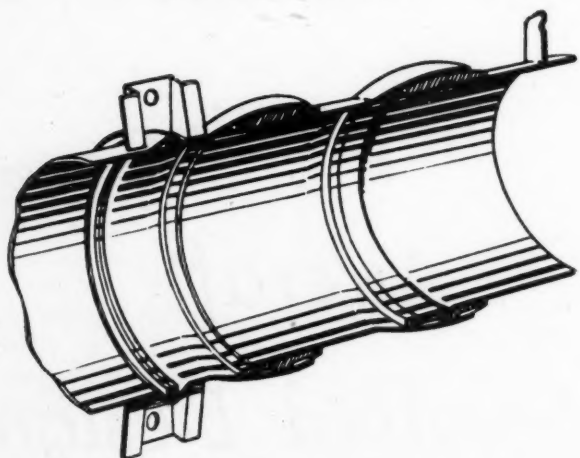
Above—Cutaway view of patented ball and socket joints for a manifold
